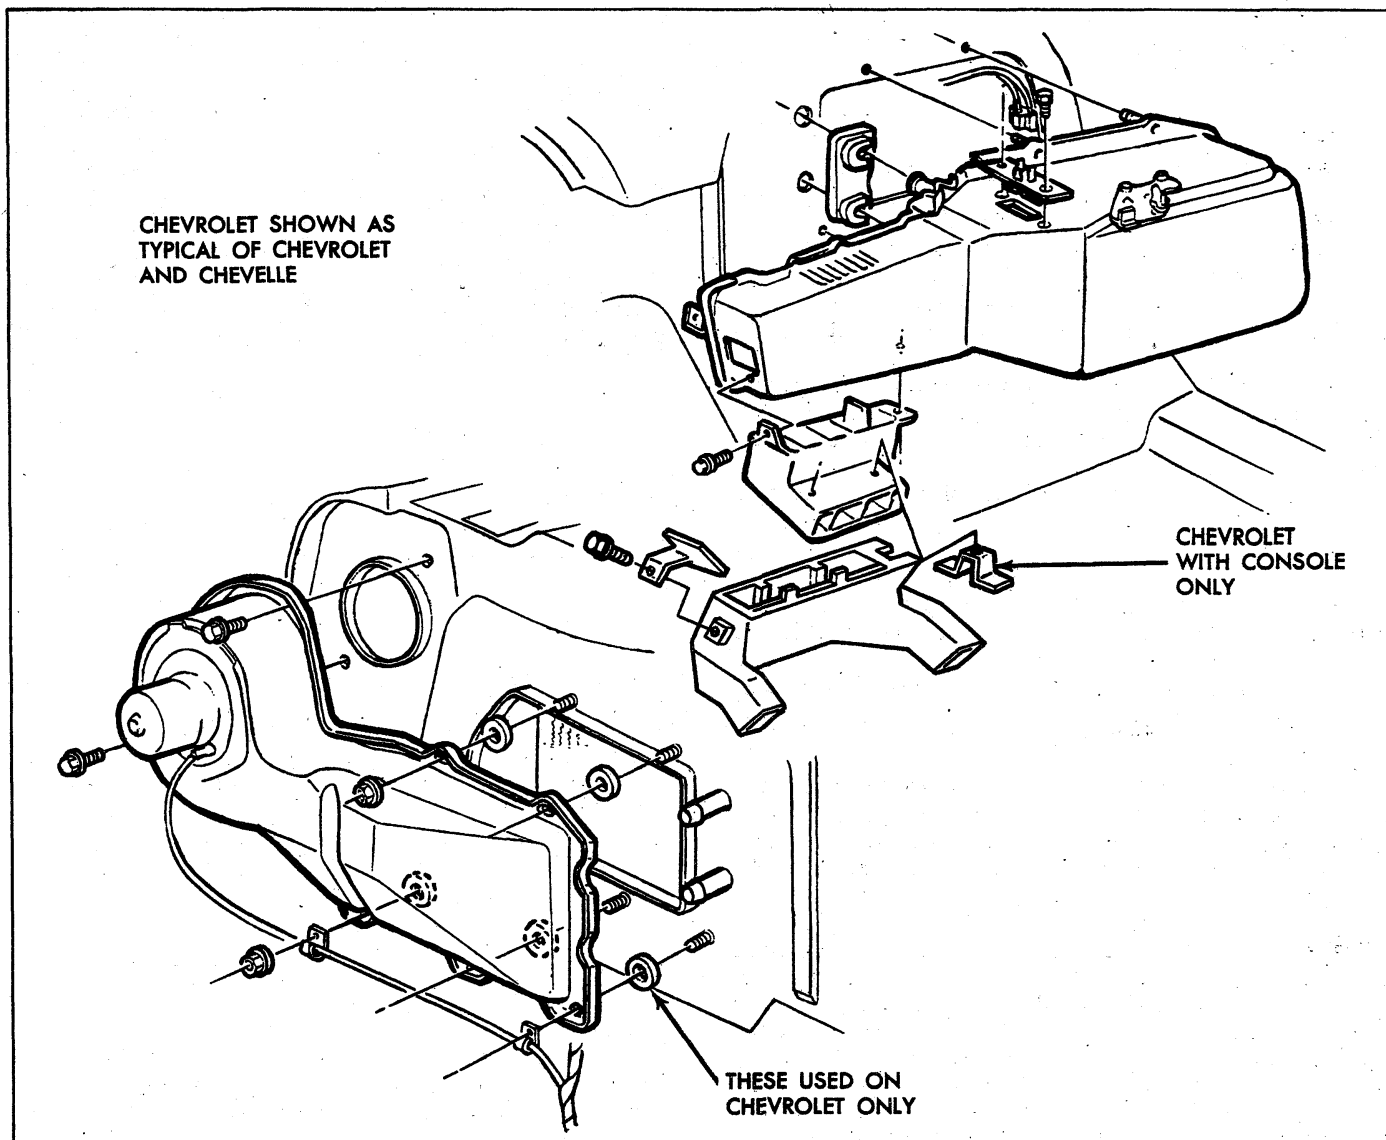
Heater Blower and Air Inlet (Chevrolet, Chevelle, Camaro)
